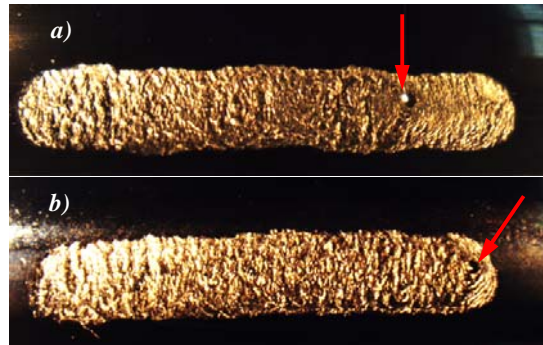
Photograph of inner race bearing: a) hybrid bearing, b) conventional bearing
